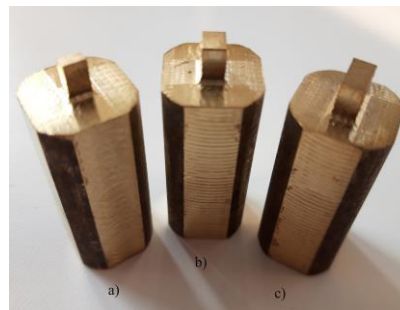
Tools for frictional mechanical processing with different lengths l :
